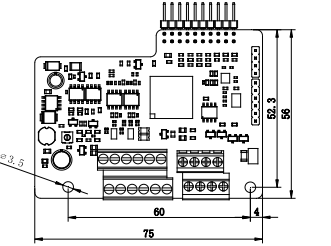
Sin/Cos encoder PG card dimension drawing
